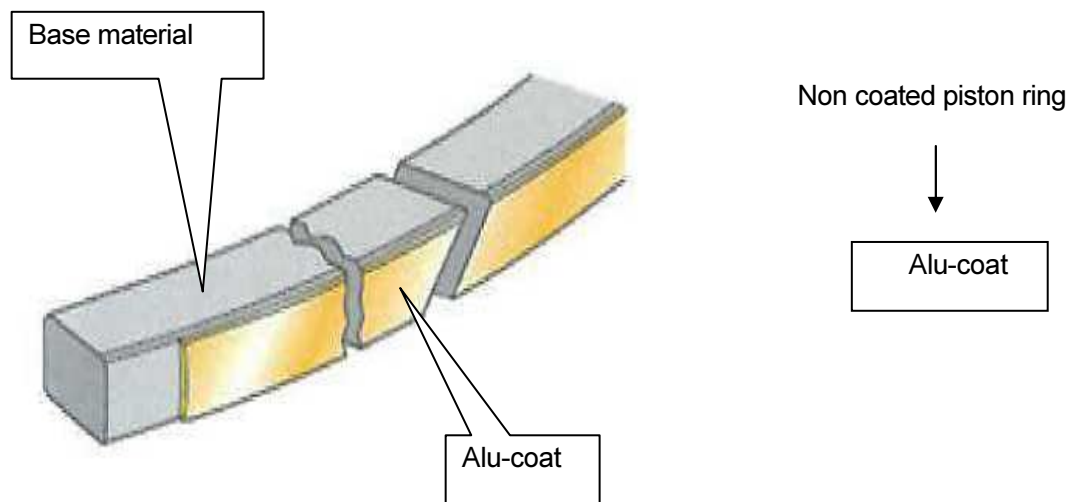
Sectional view of "Running-in Piston Ring Pack"(Alu-coat)
